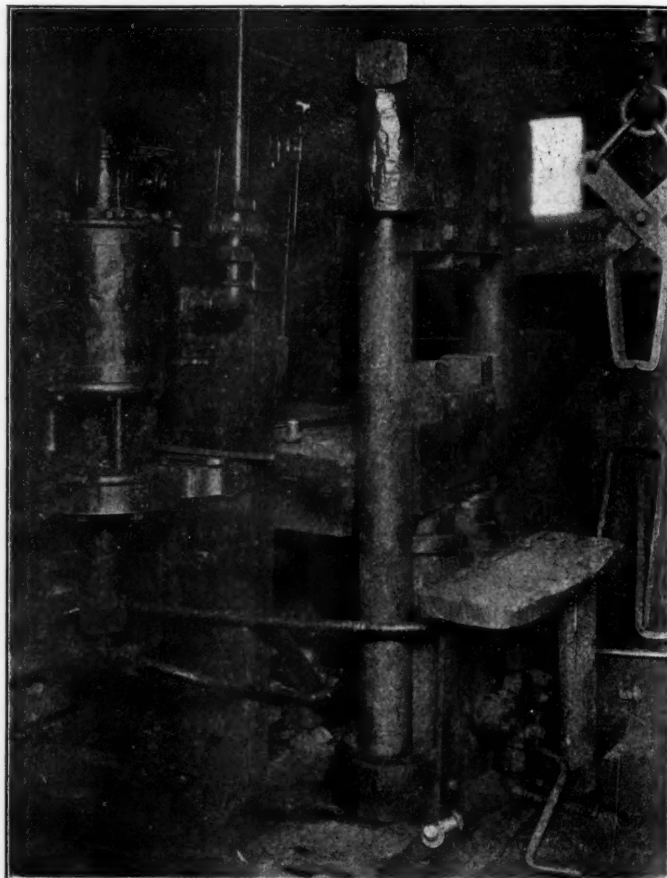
Hydraulic Press for Shearing Off Coupler Yoke Rivets.
